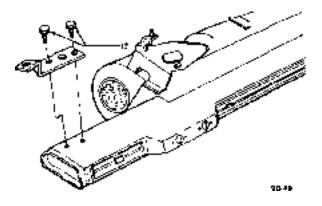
</sup>9B-68 Evaporator and Blower Assembly Center Support Bracket-Opel 1900 Manta
